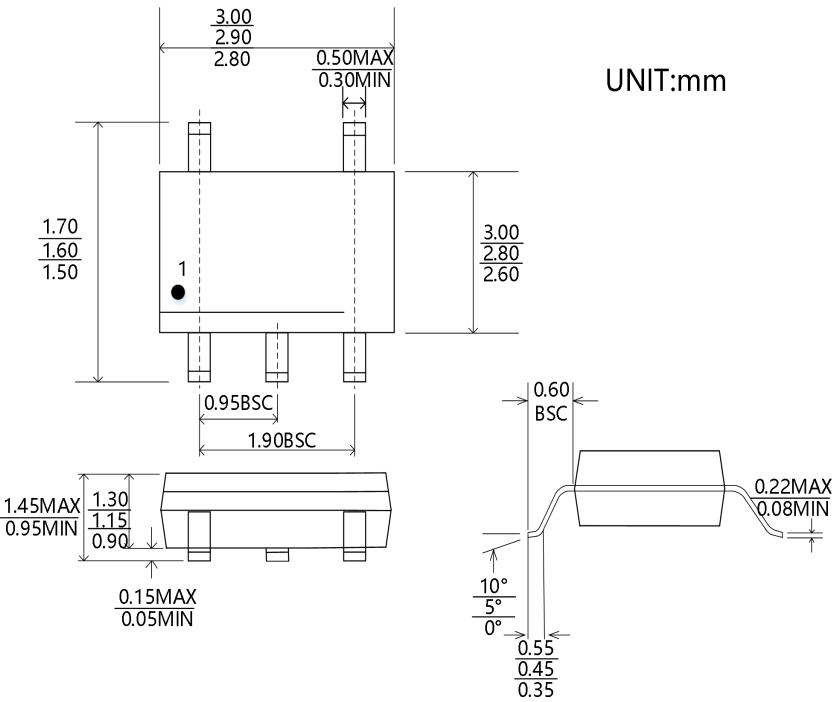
5-Lead Small Outline Transistor Package [SOT-23]
